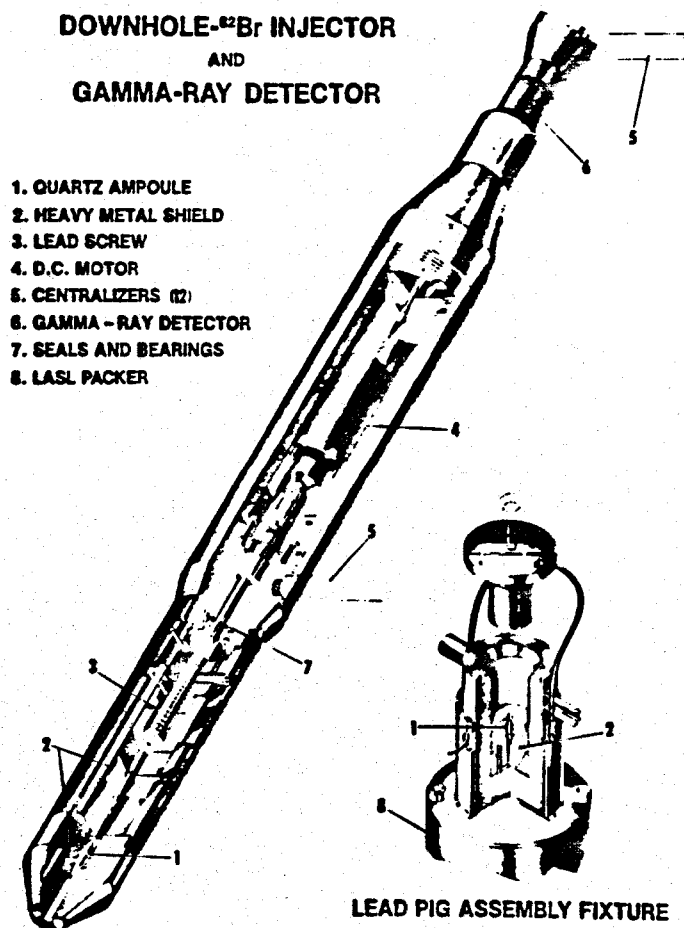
Downhole-⁸²Br Injector and Gamma-Ray Detector with Lead Pig Assembly Fixture.
